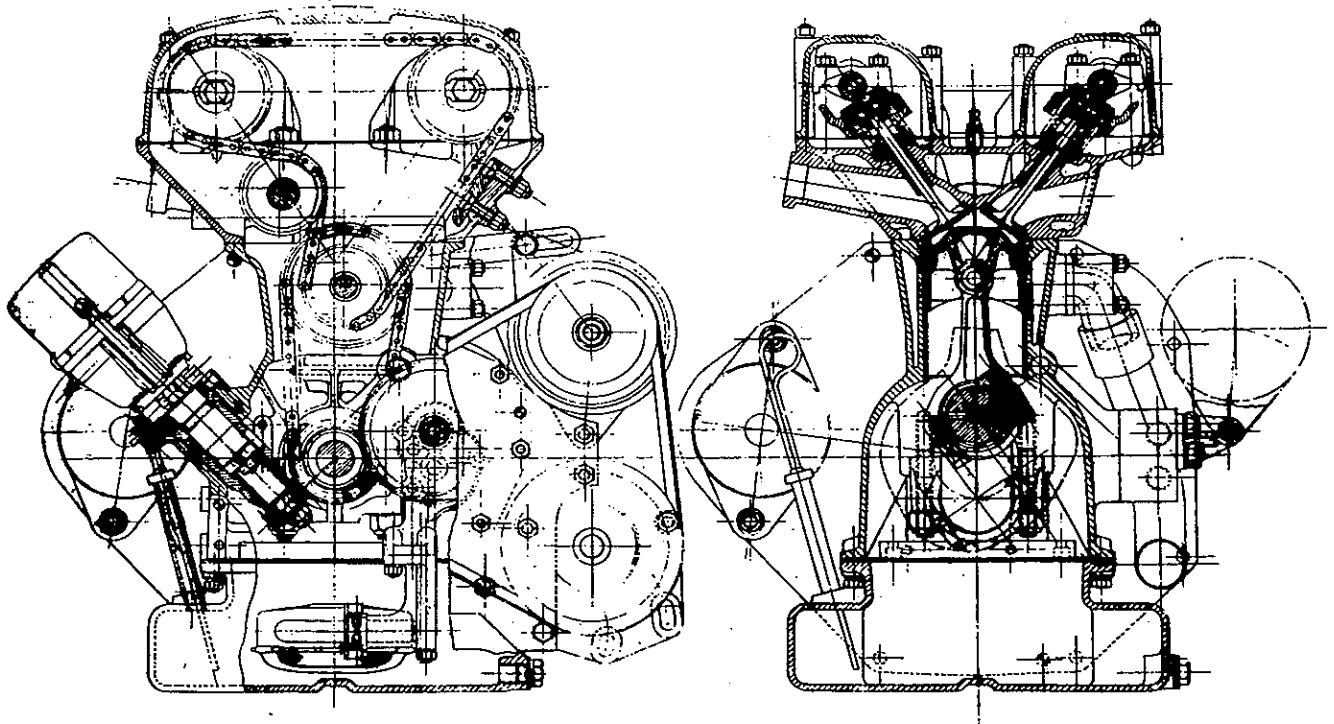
Cross-section - F.W.M.C. 742 cc engine
